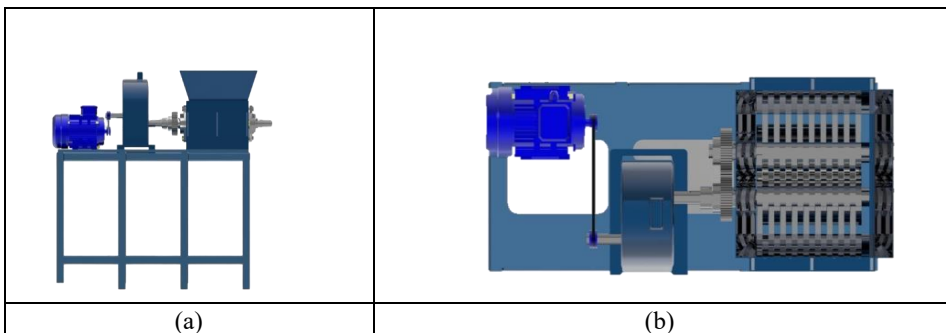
CAD model of mini plastic shredder (a) Front side view (b) Top side view
